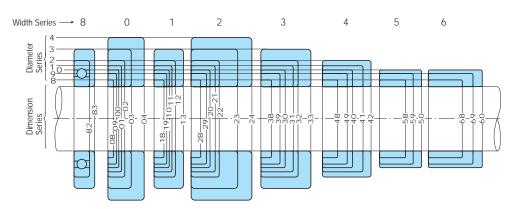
Comparison of Cross Sections of Radial Bearings (except Tapered Roller Bearings) for various Dimensional Series
